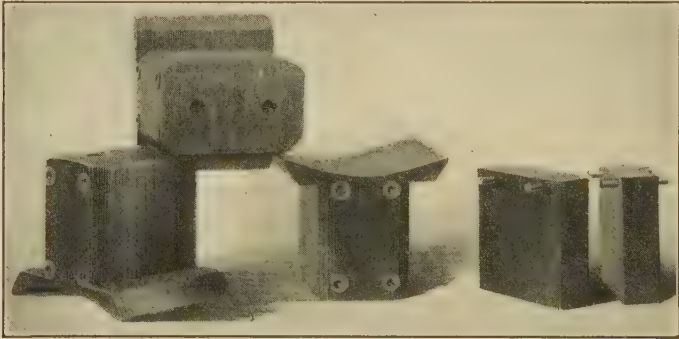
Various pole pieces. (*Courtesy the Reliance Electric & Engineering Company.*)
